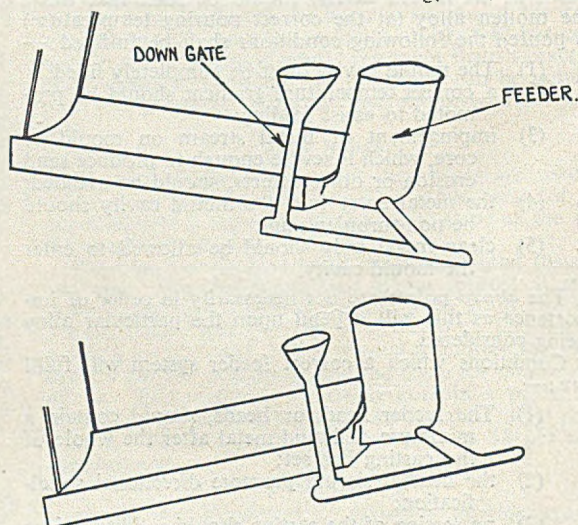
POURING AND FEEDING POSITIONS IN THE PARTIAL-REVERSAL CASTING METHOD.
